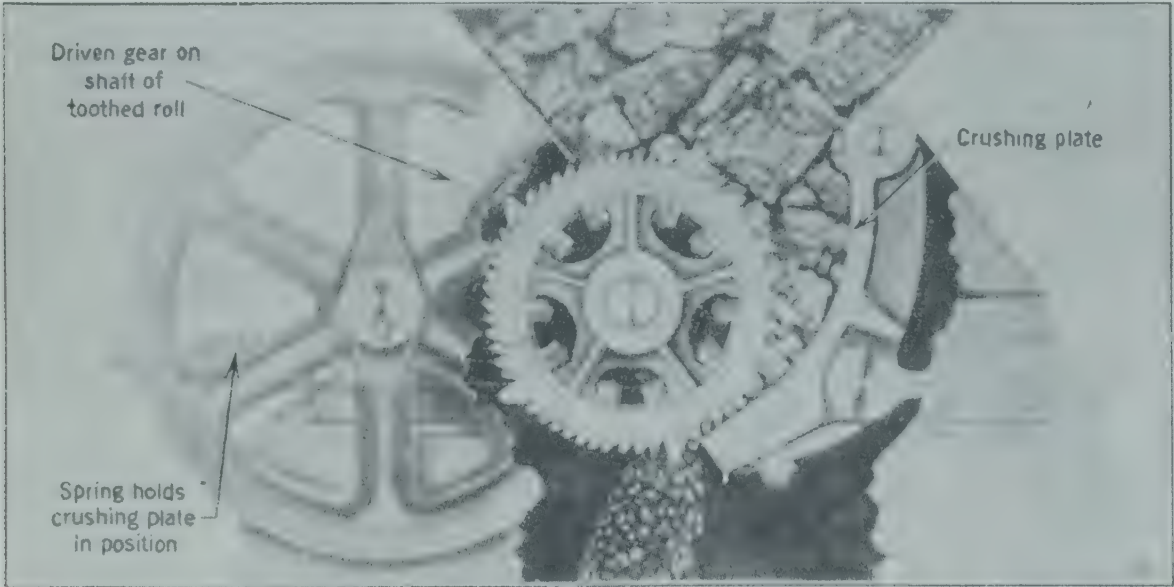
Sectional drawing showing operation of toothed roll crusher. (Link-Belt Co.)
